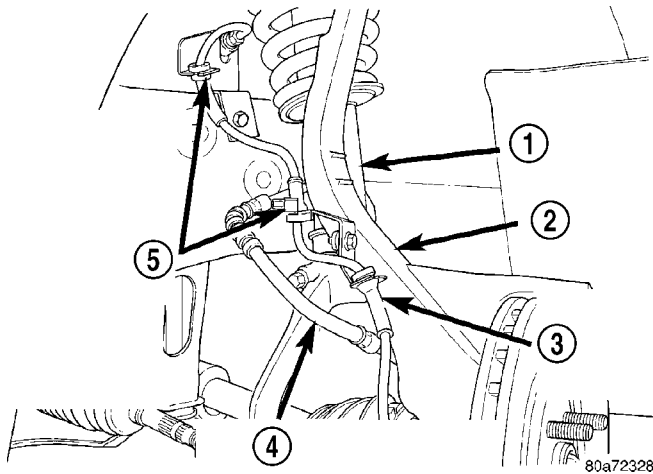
Correct Front Wheel Speed Sensor Cable Routing
